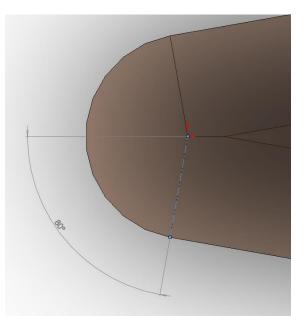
Example tool shown parallel to rake face in the radial clearance plane. In normal cutting (no skew), the radial clearance is $\pm 80^{\circ}$
